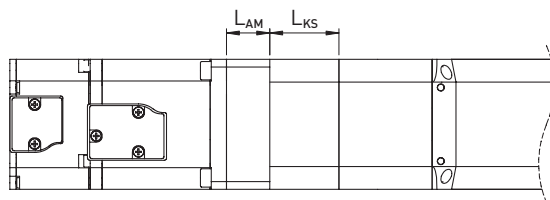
Motor connection of linear modules HM-S without belt drive
